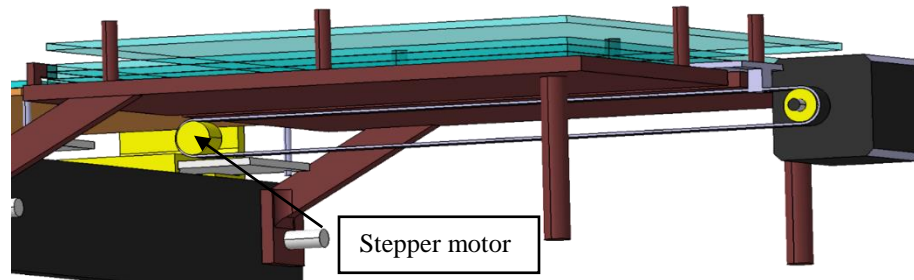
Final assembly drawing of the bed replacer treadmill mechanism and stepper motor
